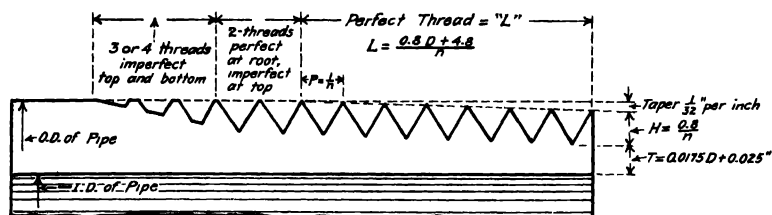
Brigg's standard pipe thread used on screw casing.
